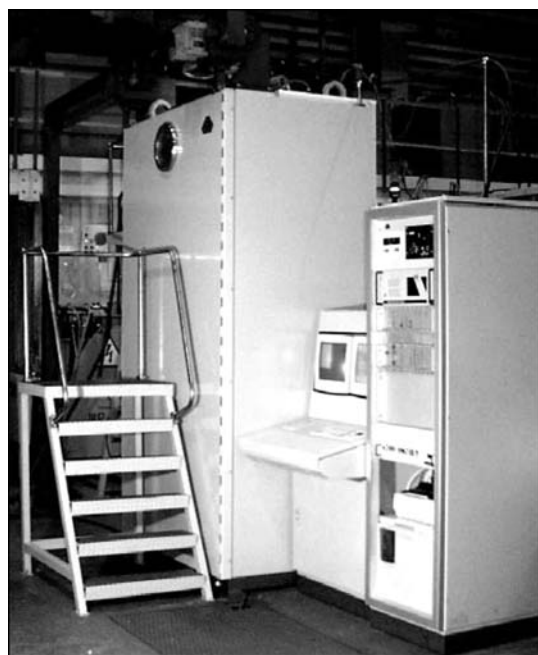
UL-178M machine for welding heat exchanger components (I.I. Afrikantov DB, Nizhniy Novgorod, RF)
